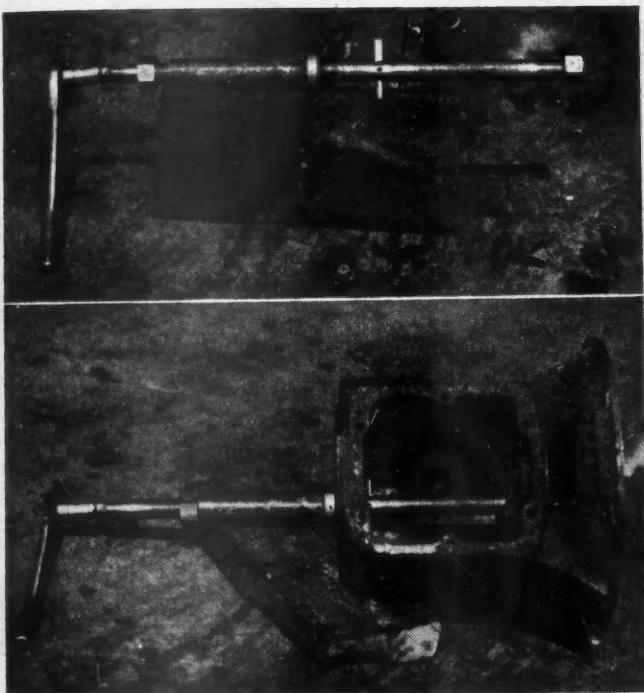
Another tool designed by Mr. Leach is this fly-cutter for reclaiming Ford transmission housings and the counter-shafts. Below. Tool reams out the rebuilt bearing
